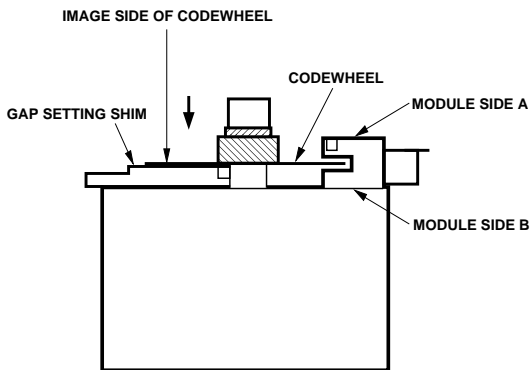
Alignment Tool is Used to Set Height of Codewheel.
